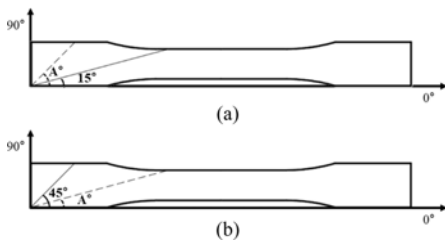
Representation of tool path: (a) tool path (A/15); (b) tool path (A/45).
